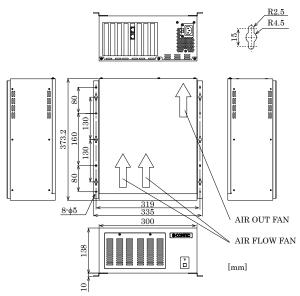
Outside Dimensions < ECH(PCI)SF-F7A, Horizontally placed >
